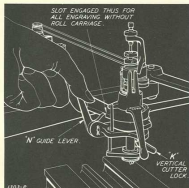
ARRANGING MACHINE FOR FLAT WORK
